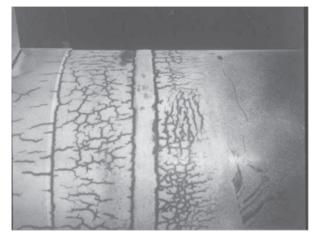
Dye Penetrant Inspection Showing Extensive Cracking around Welds
